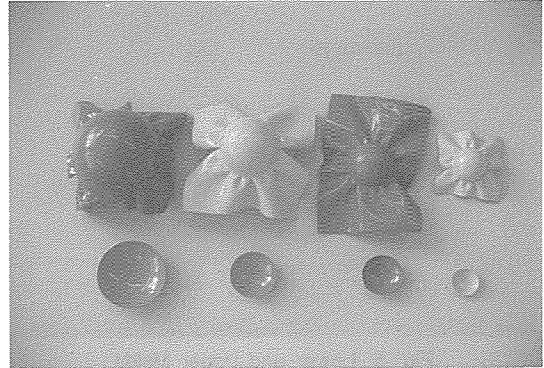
Formed Specimen with Four Different Mold Sizes.
